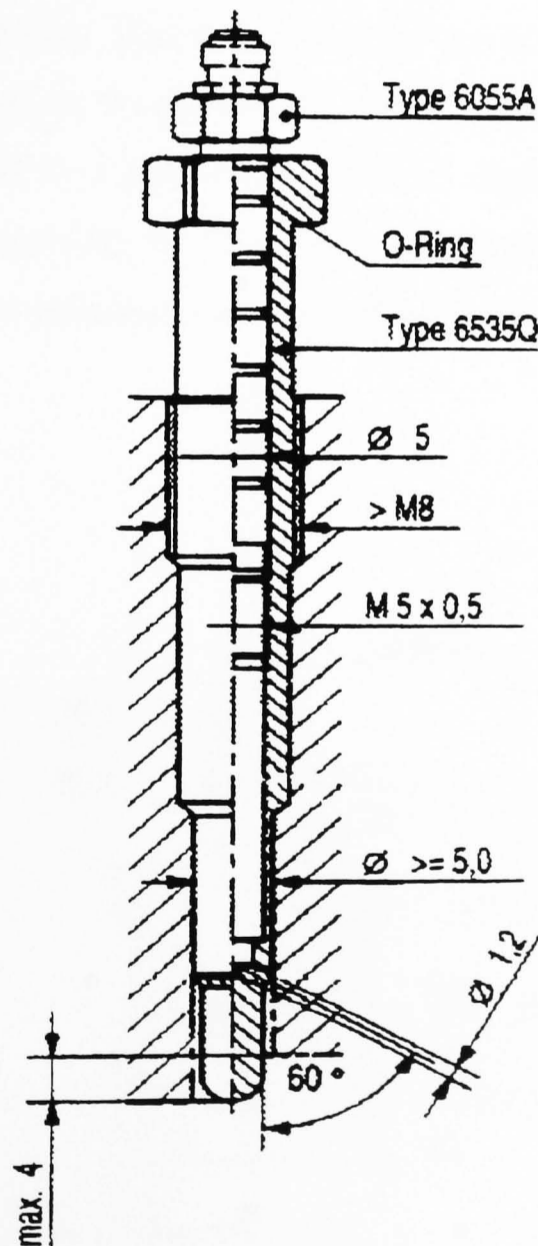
Kistler type 6055B80 cylinder pressure transducer, installed in a glow-plug adapter similar to the one used for the Lynx Upgrade engine [Kistler, 1997].
